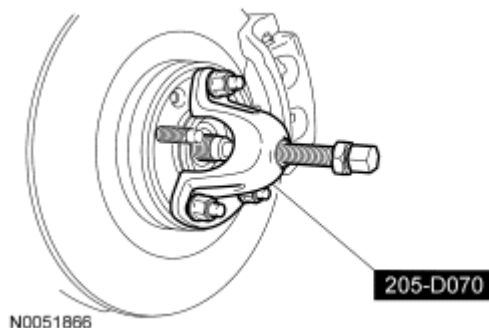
Separating RH Halfshaft From Hub Using Special Tool (205-D070)
